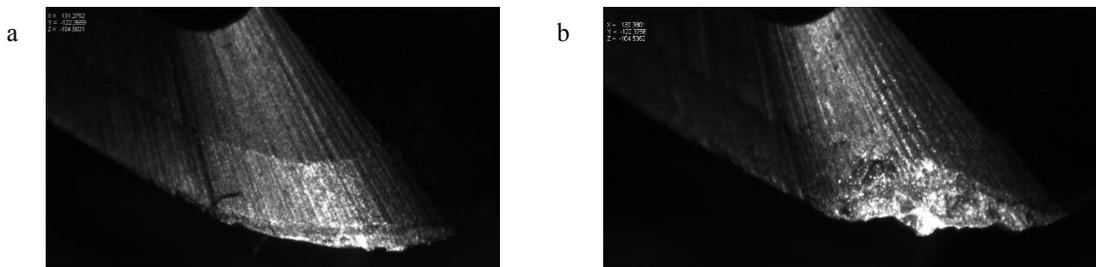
(a) Cutting tool after Inconel 718 climb machining (b) Cutting tool after Inconel 738 LC climb machining.
